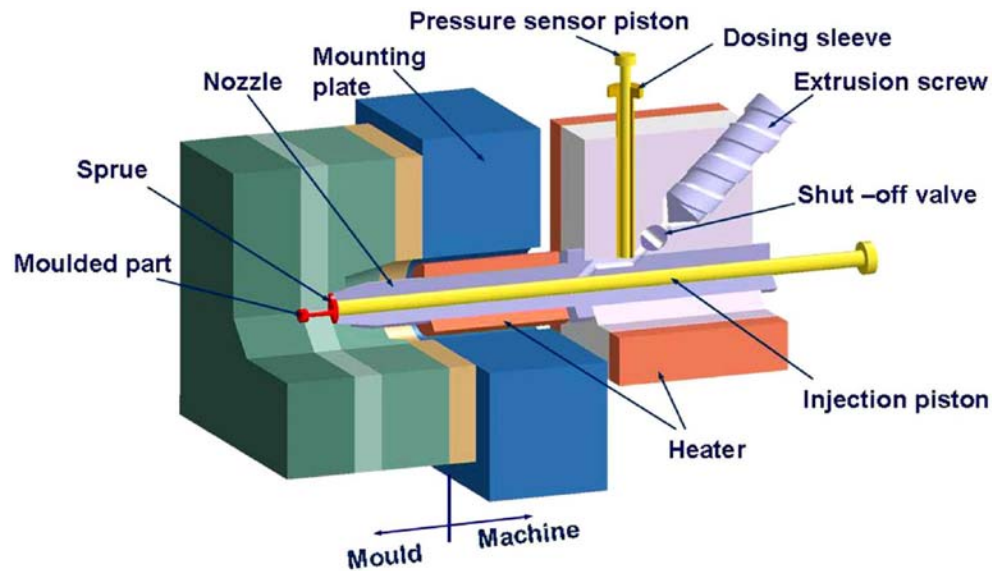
Injection unit of a micro injection moulding machine [Ganz, 2005].
